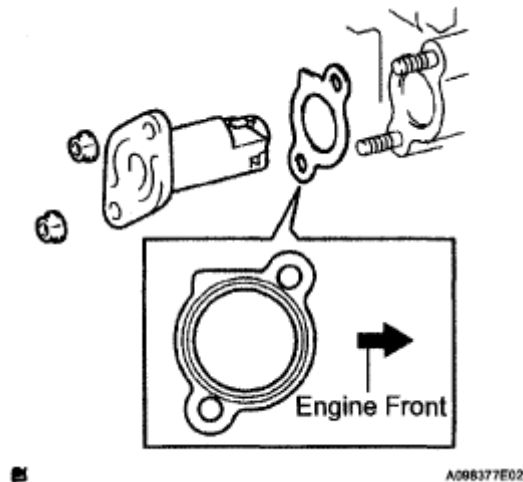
Identifying Chain Tensioner Gasket And Nuts
